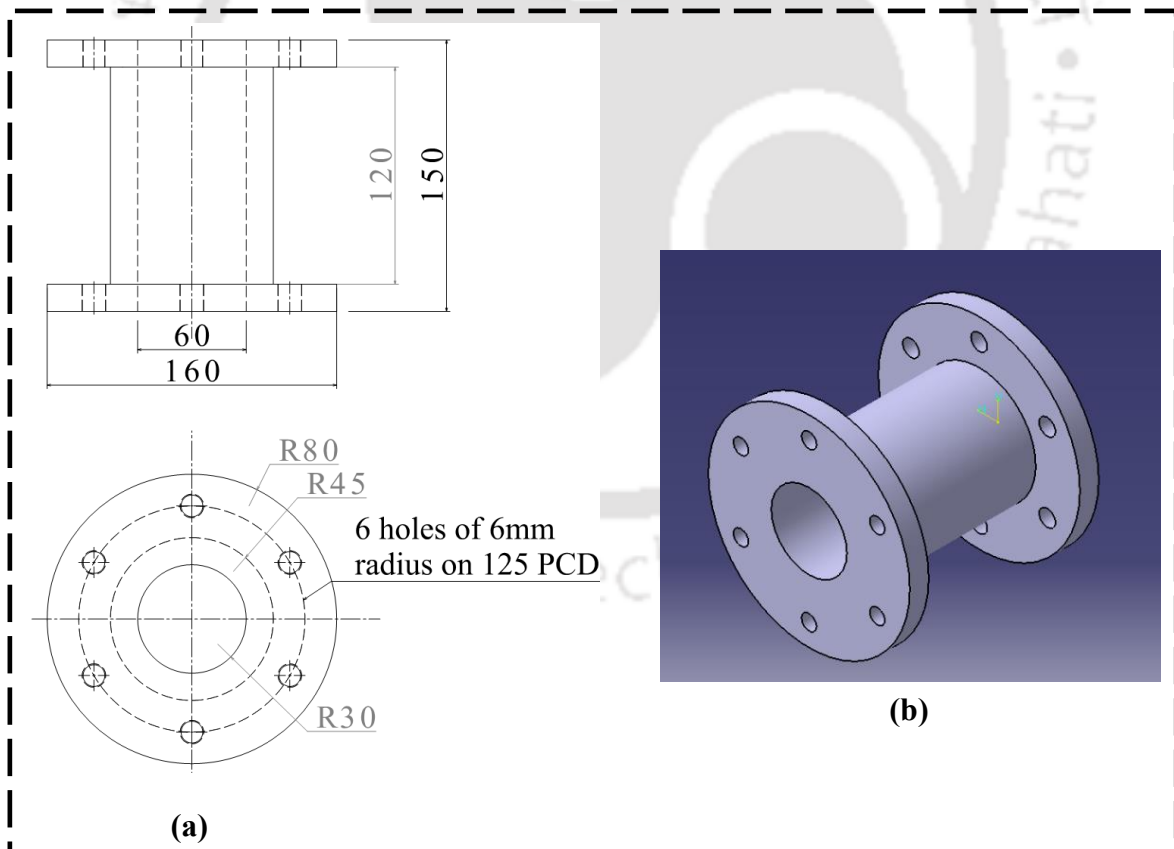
(a) 2-D drawing of medium cylinder with dimensions (b) 3-D model of medium cylinder (All dimensions are in mm).
